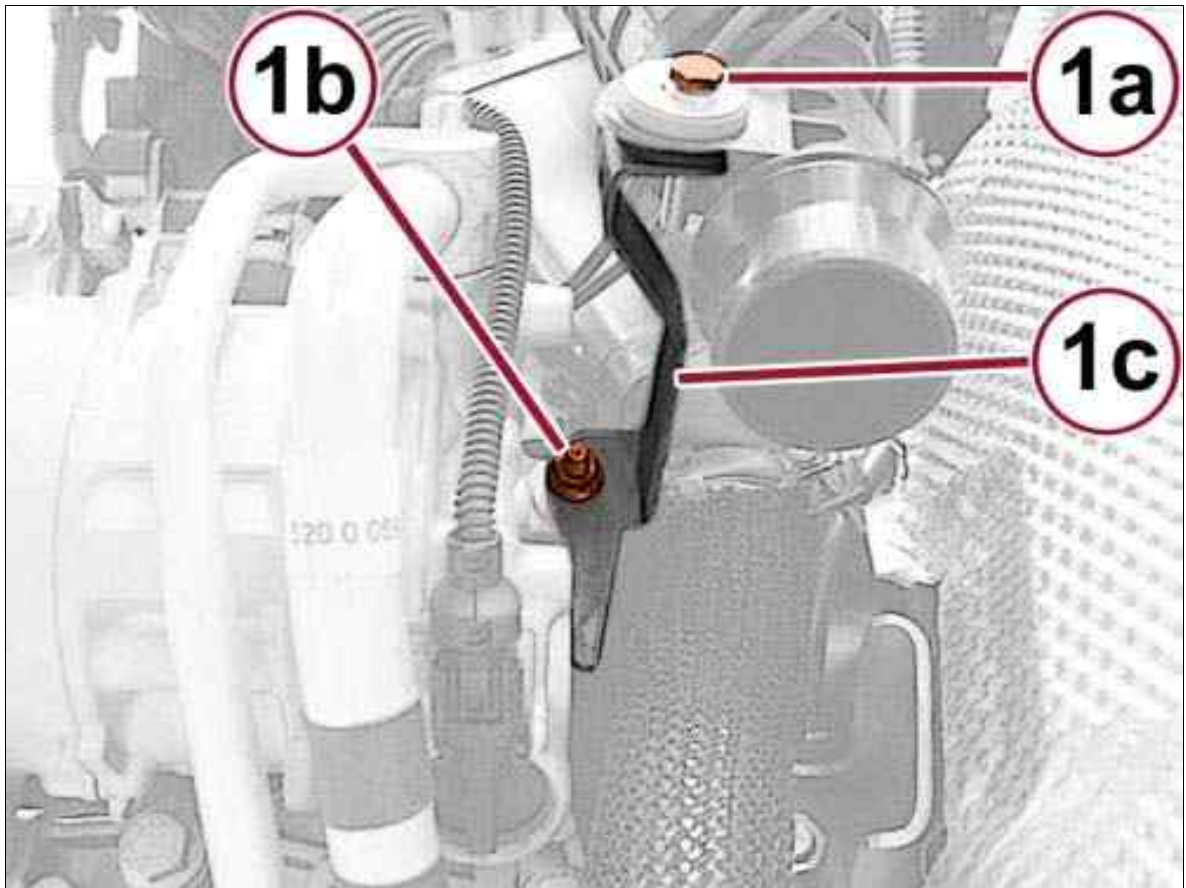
Compressor, Retaining Clip, Coupling & Internal Heat Exchanger
